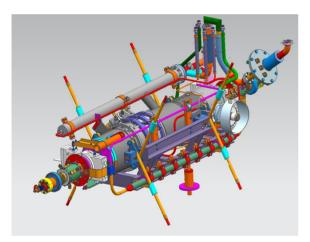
Design of CC-1's internals showing the dressed cavity, input coupler, upstream end bellows and valve assembly, cryogenic and relief piping, tension support rods, and support frame. The axial support is visible at the bottom.
